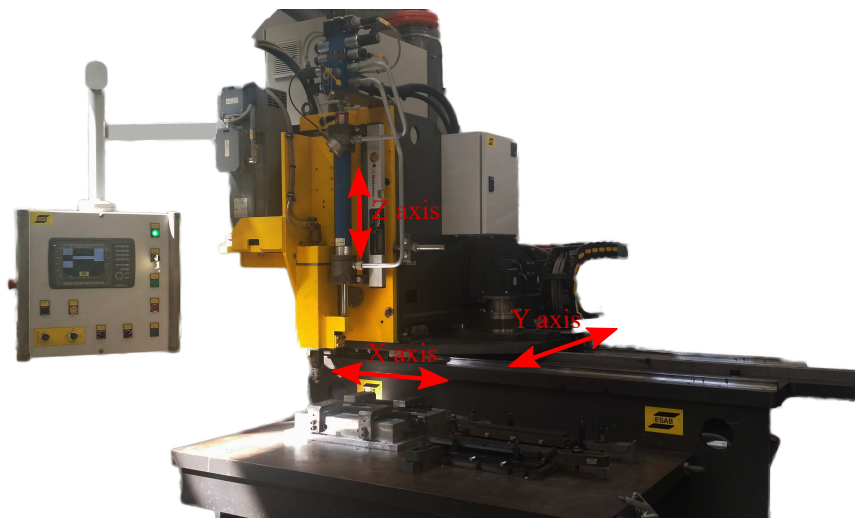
FSW machine used for aluminum alloy AA6082 joints.
